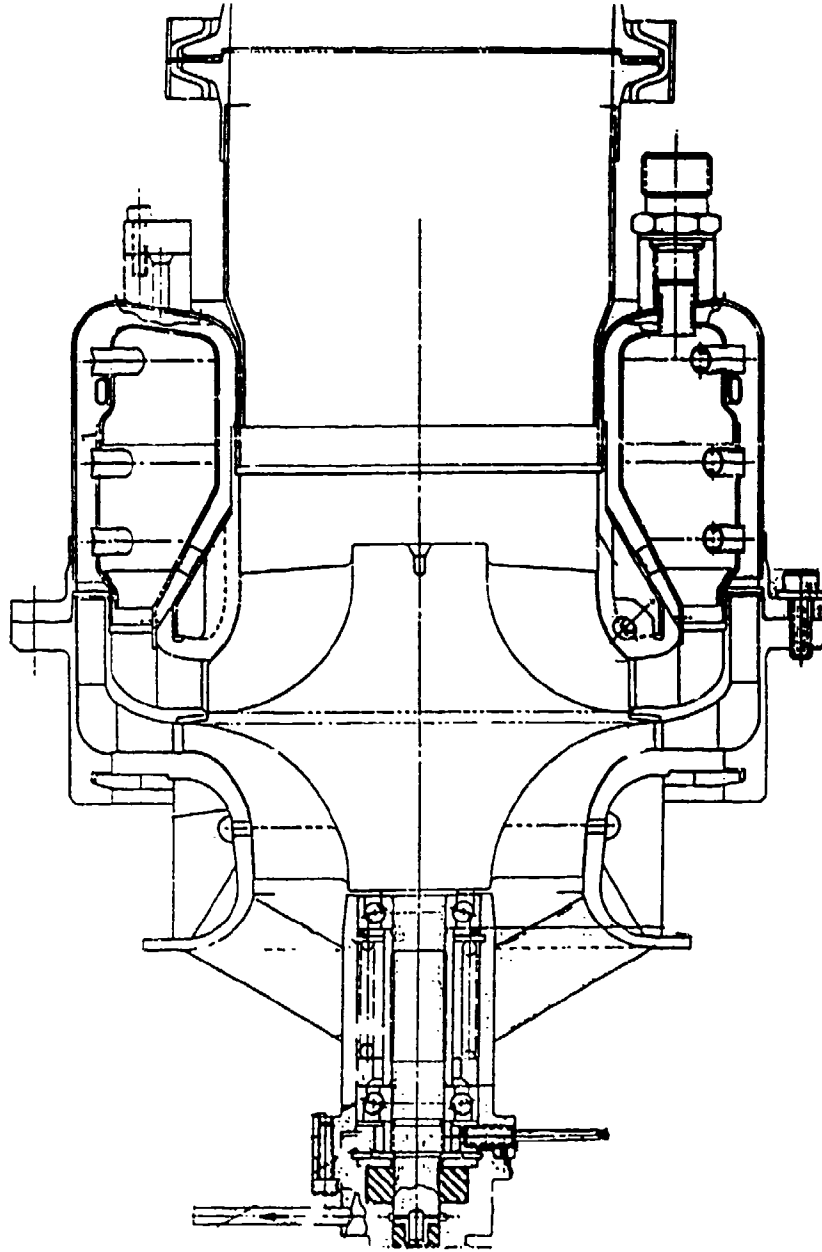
Cross section of Sundstrand TJ-90 turbojet engine.
